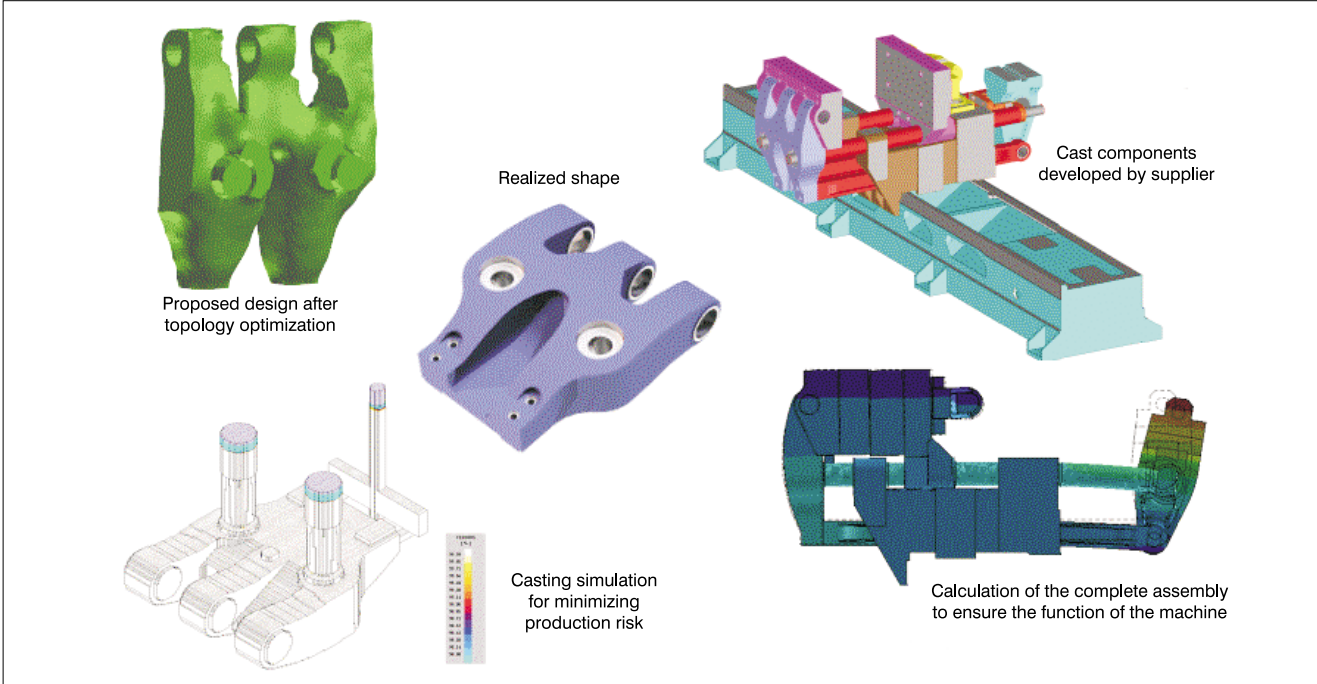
Topology-optimized clamping lever of a blow-forming machine, Material: EN-GJS-400-18, dimensions 770 × 640 × 200 mm, weight: 350 kg)
